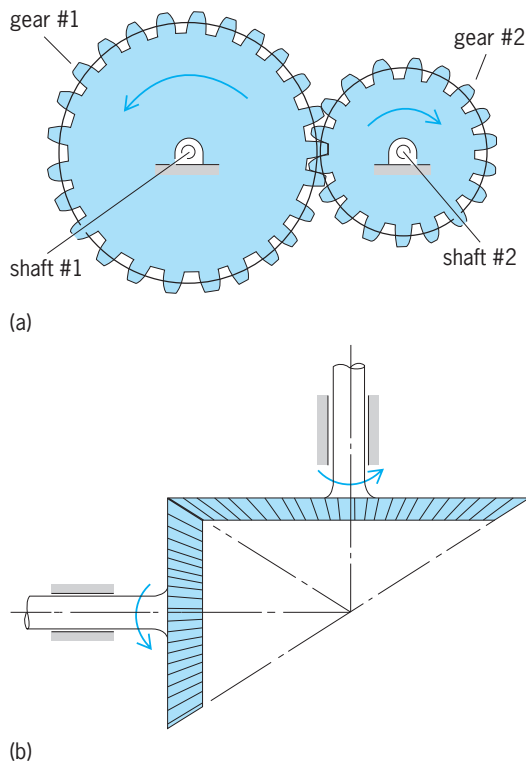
Gear configurations. (a) Spur gears. (b) Bevel gears.
